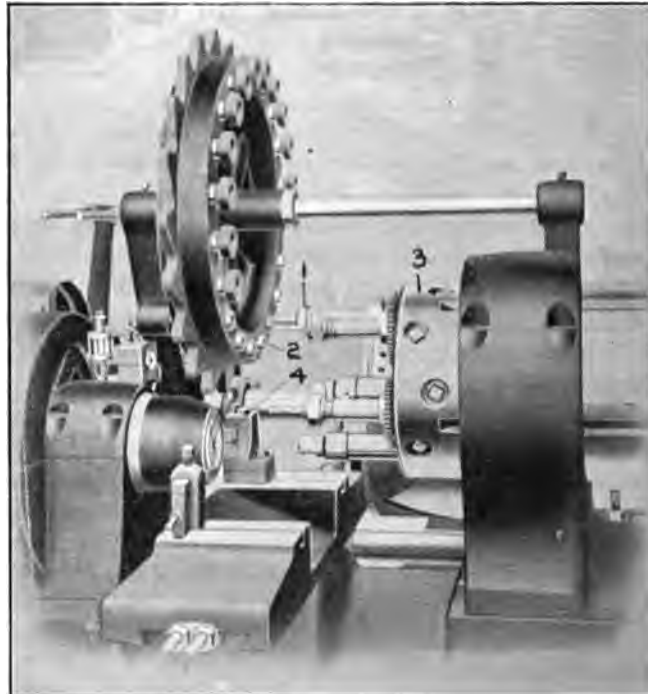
INDEXING MAGAZINE ATTACHMENT. CLEVELAND AUTOMATIC MACHINE CO.
